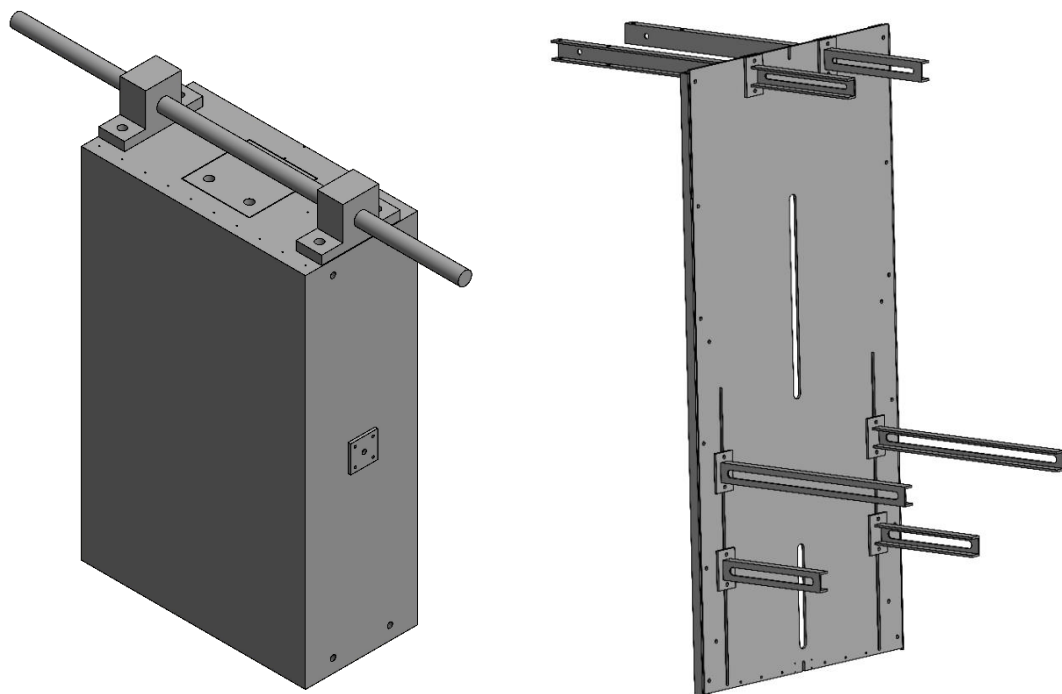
Technical drawings: (left) block 2 equipped with rod used for over-turning mechanism (Fig. 2.1aiii) and (right) steel plate including all steel profiles to hold the blocks in place; the plate was either lying flat on the basin bottom for the capsizing case (with all but the two long UPN profiles on the right-hand side removed) or fixed to the basin wall for all other cases (where the six remaining UPN profiles were used, for details see Appendix B).
